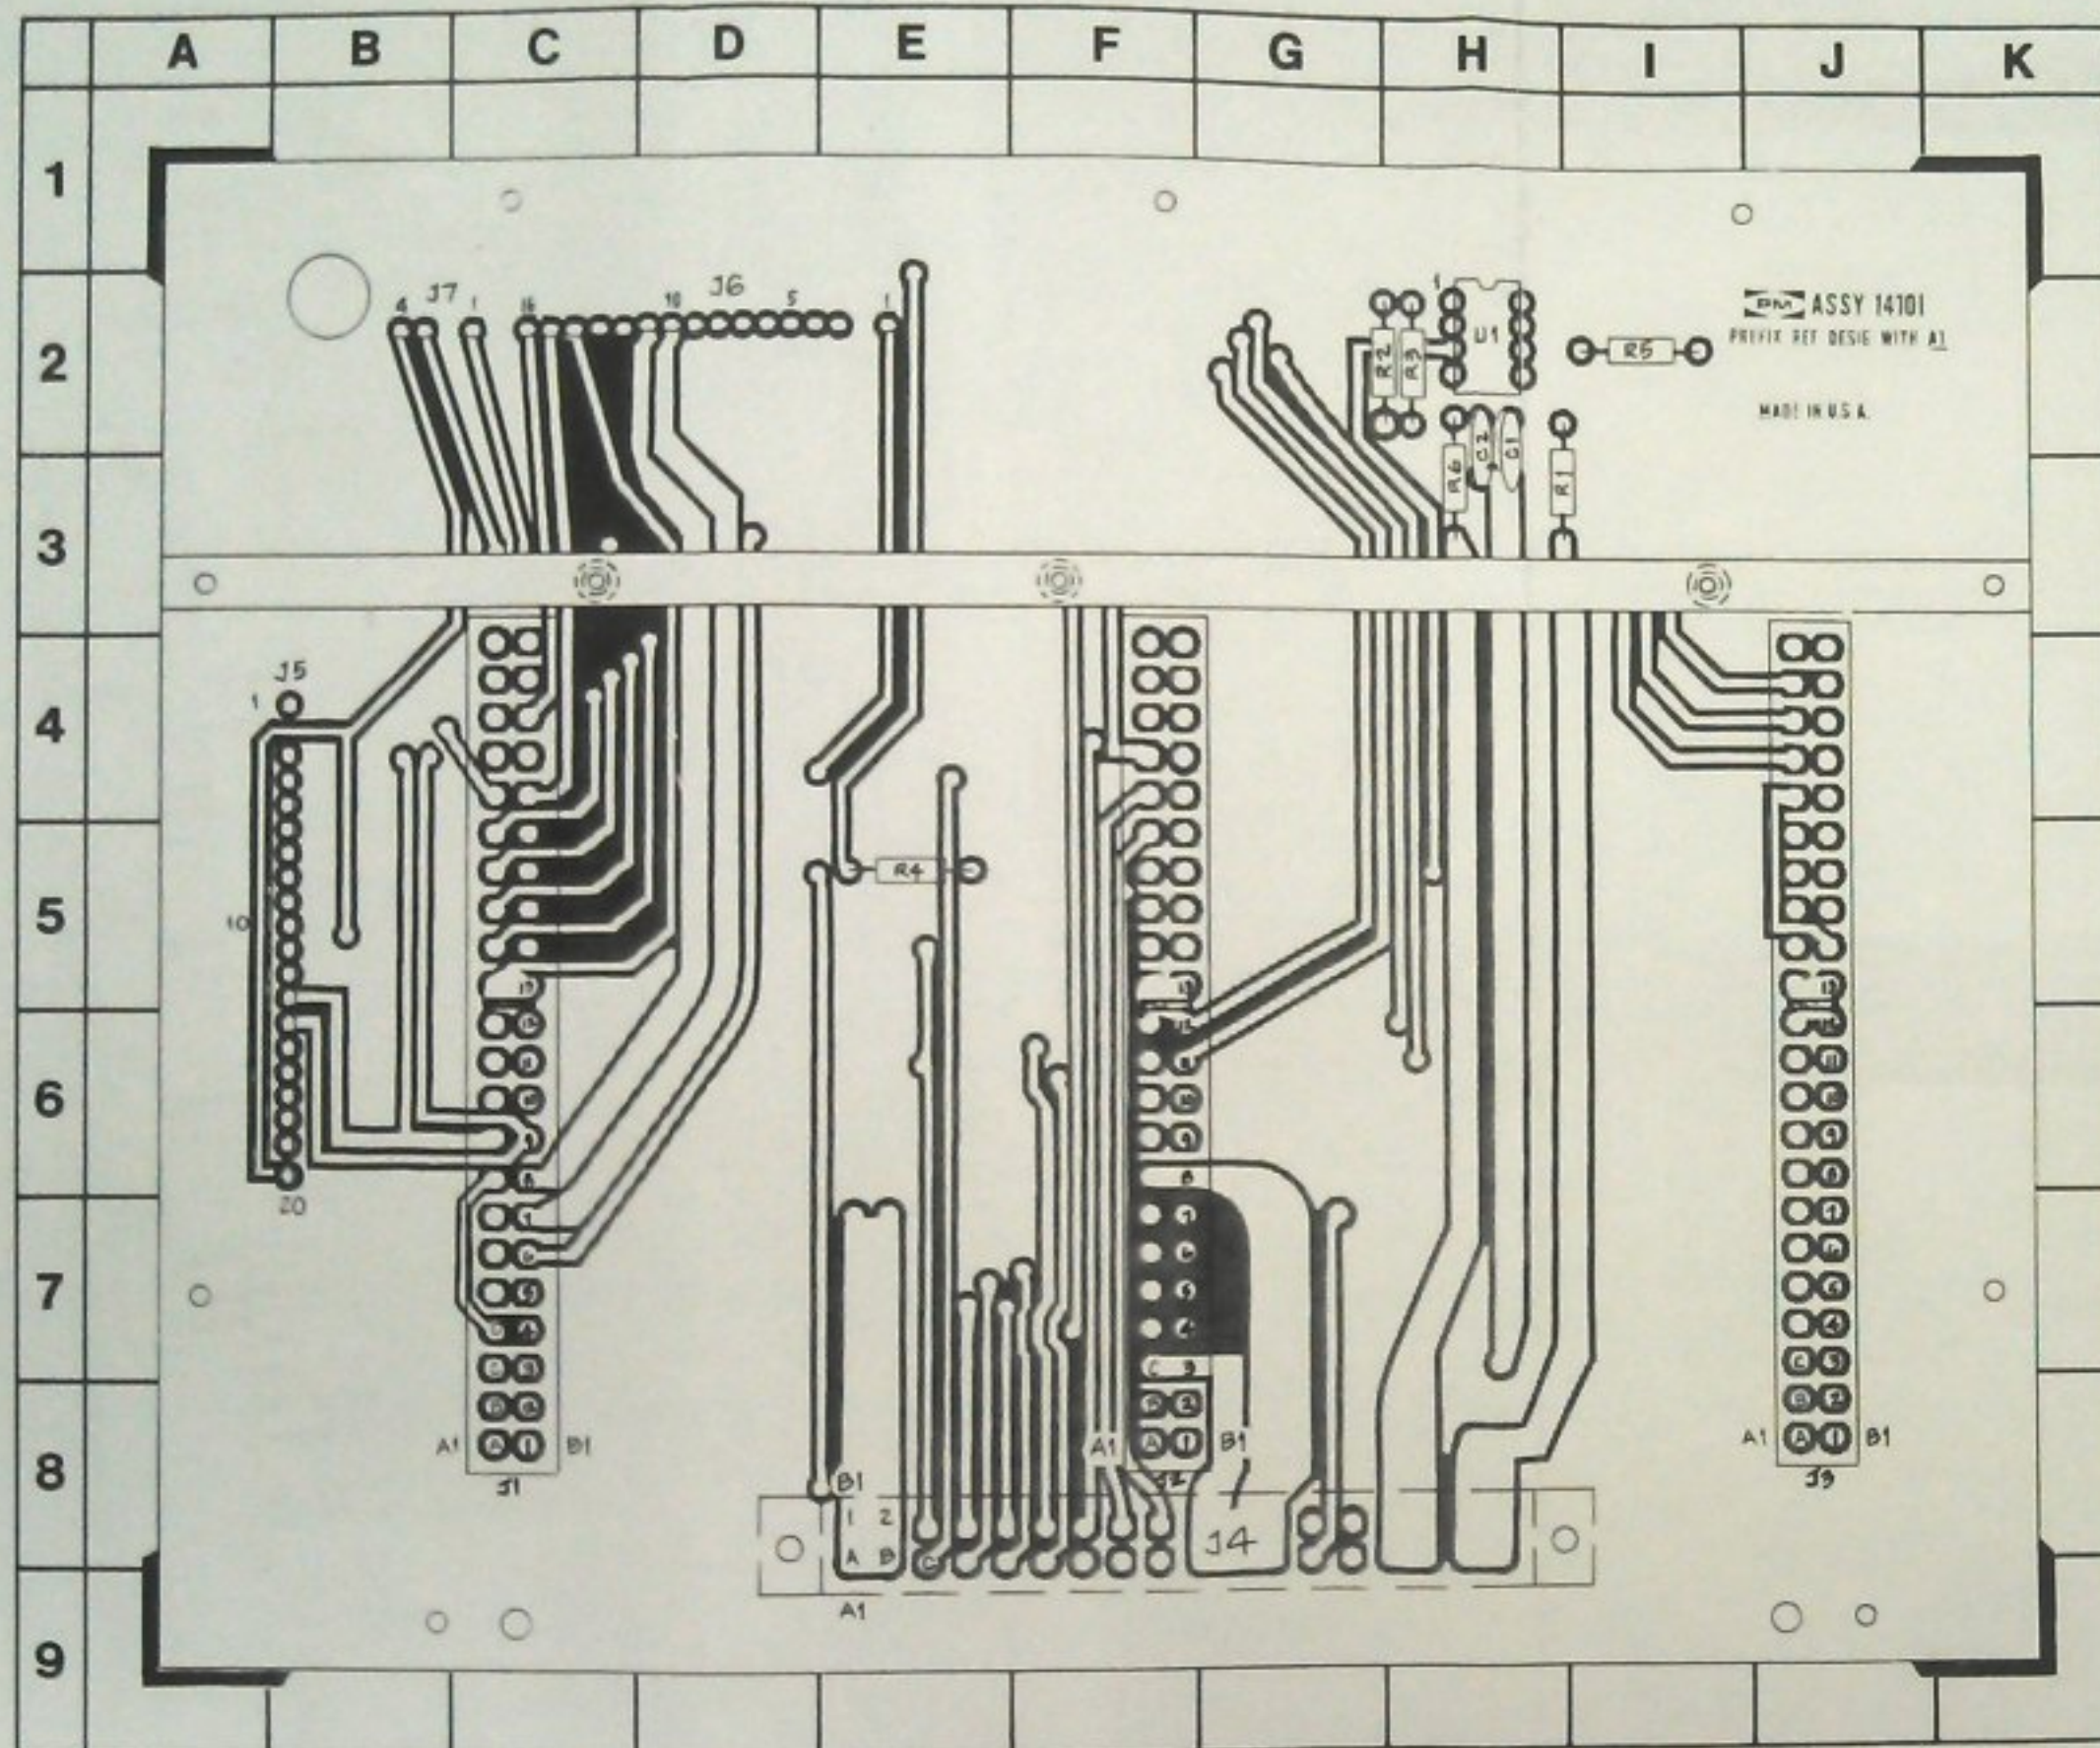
IEEE INTERCONNECT PCB ASSEMBLY
